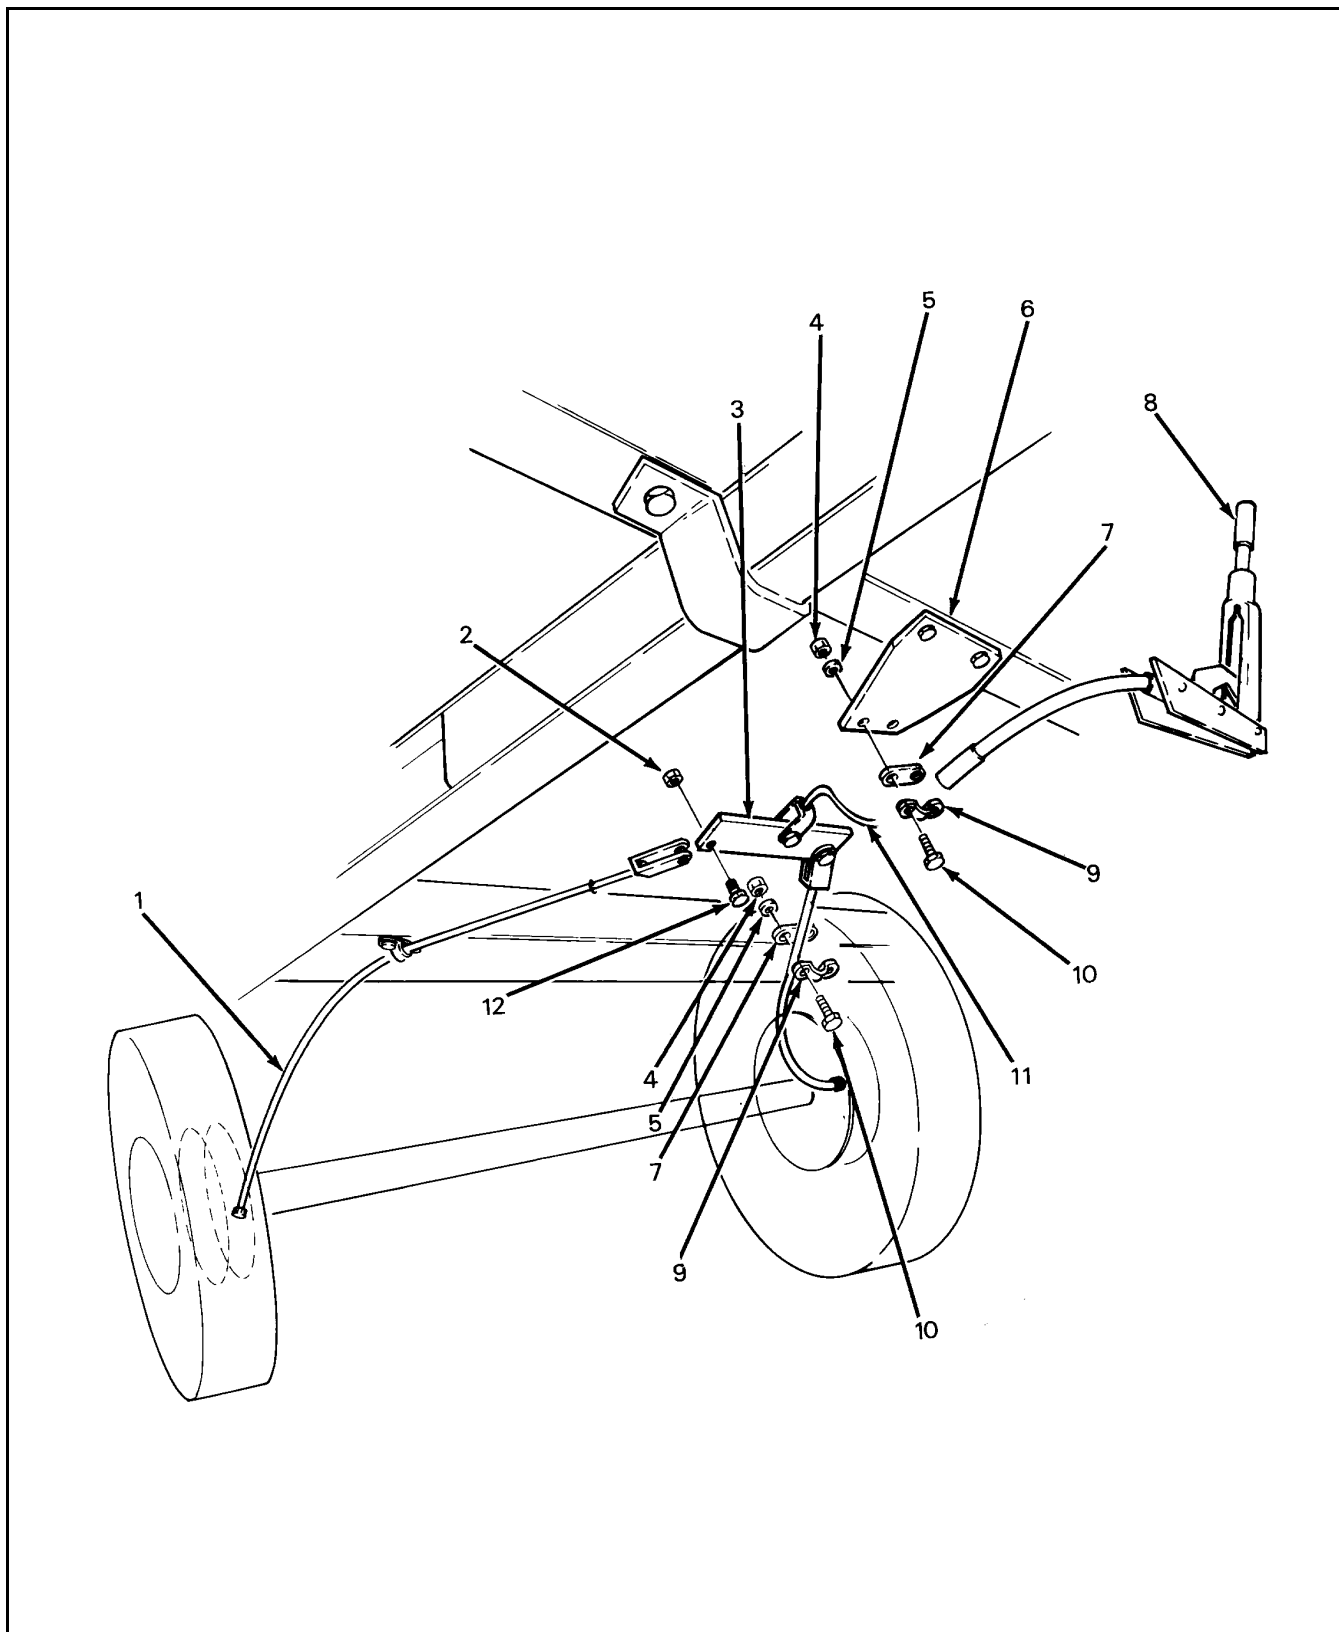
(Sheet 1 of 2) Park Brake Assembly
